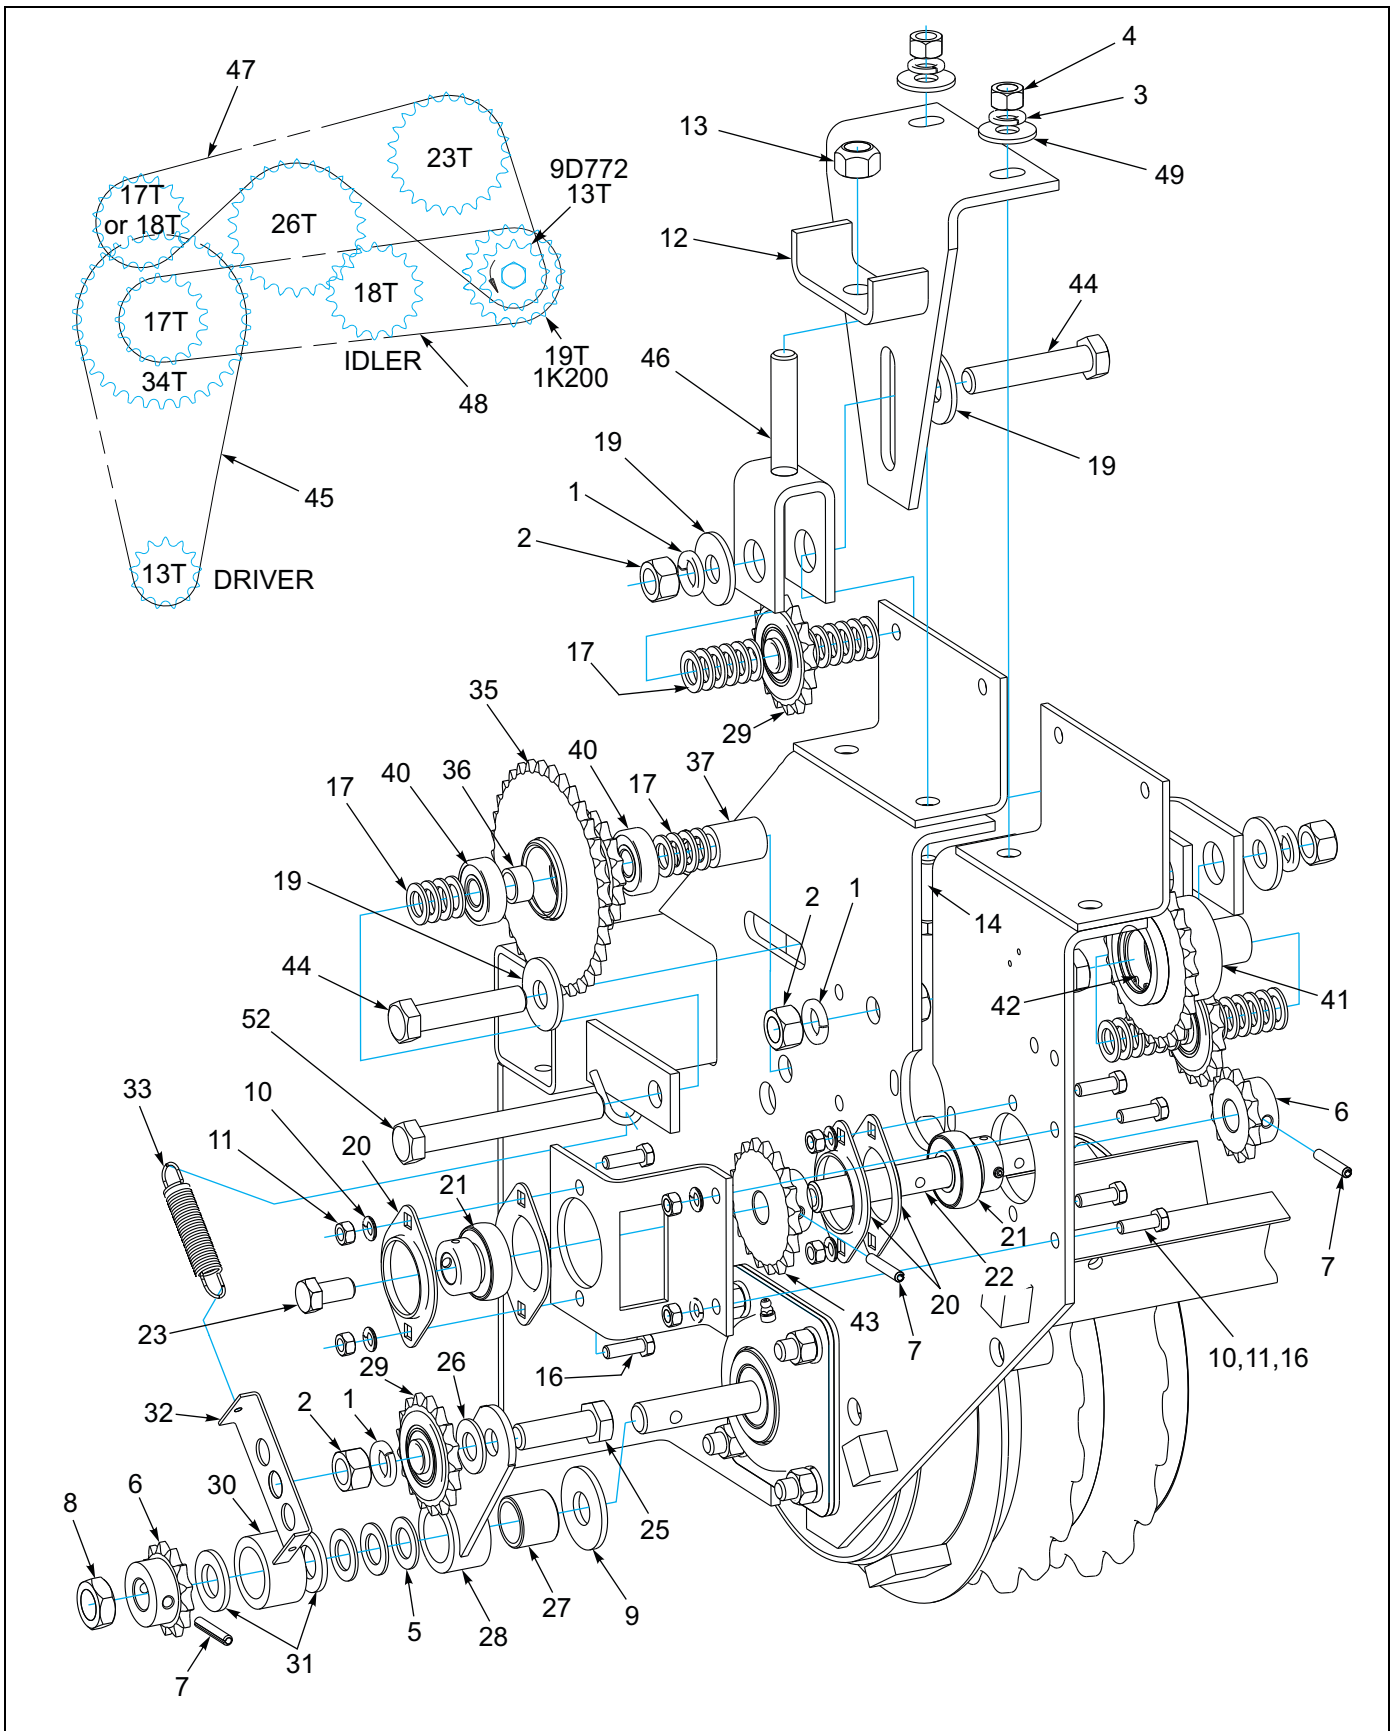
Drive Sprockets and Chain Assembly - 1 of 2
